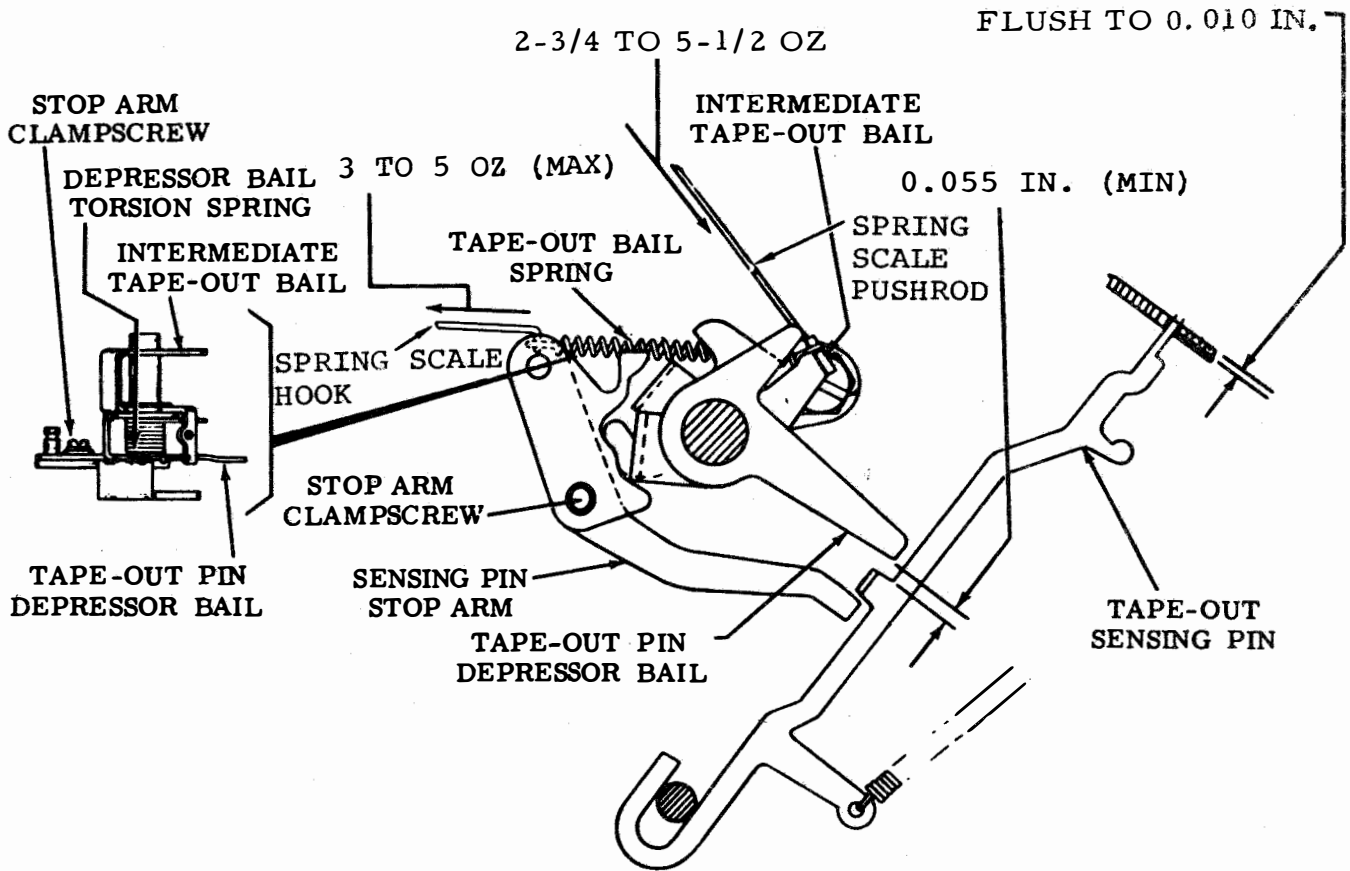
Tape-Out Sensing Pin, Depressor Bail Torsion Spring, and Intermediate Tape-Out Bail Spring, Front View
